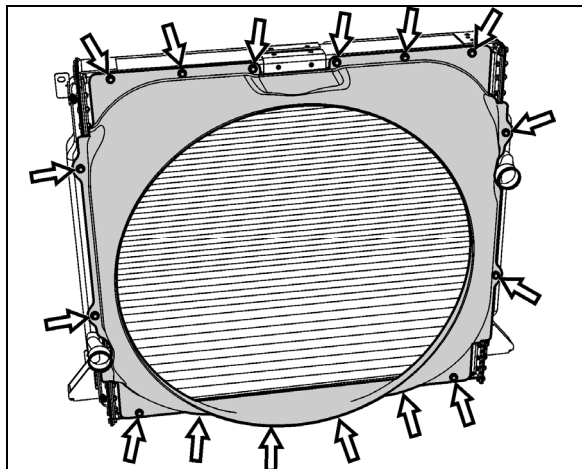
REMOVING FAN SHROUD FROM RADIATOR
